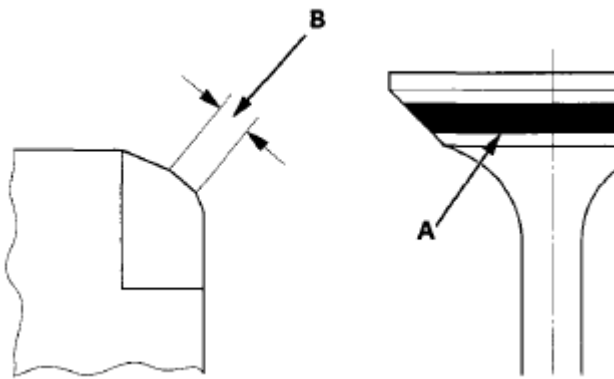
Identifying Prussian Blue Compound In Valve Face
